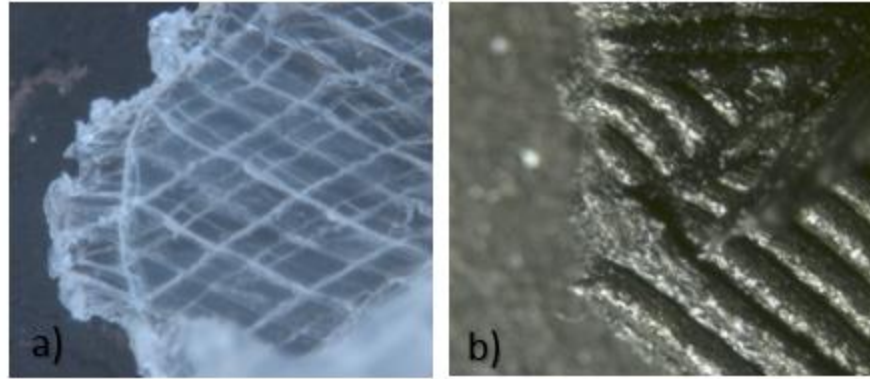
Close-up of failure mechanism of a) Nylon specimen; b) Onyx sample
